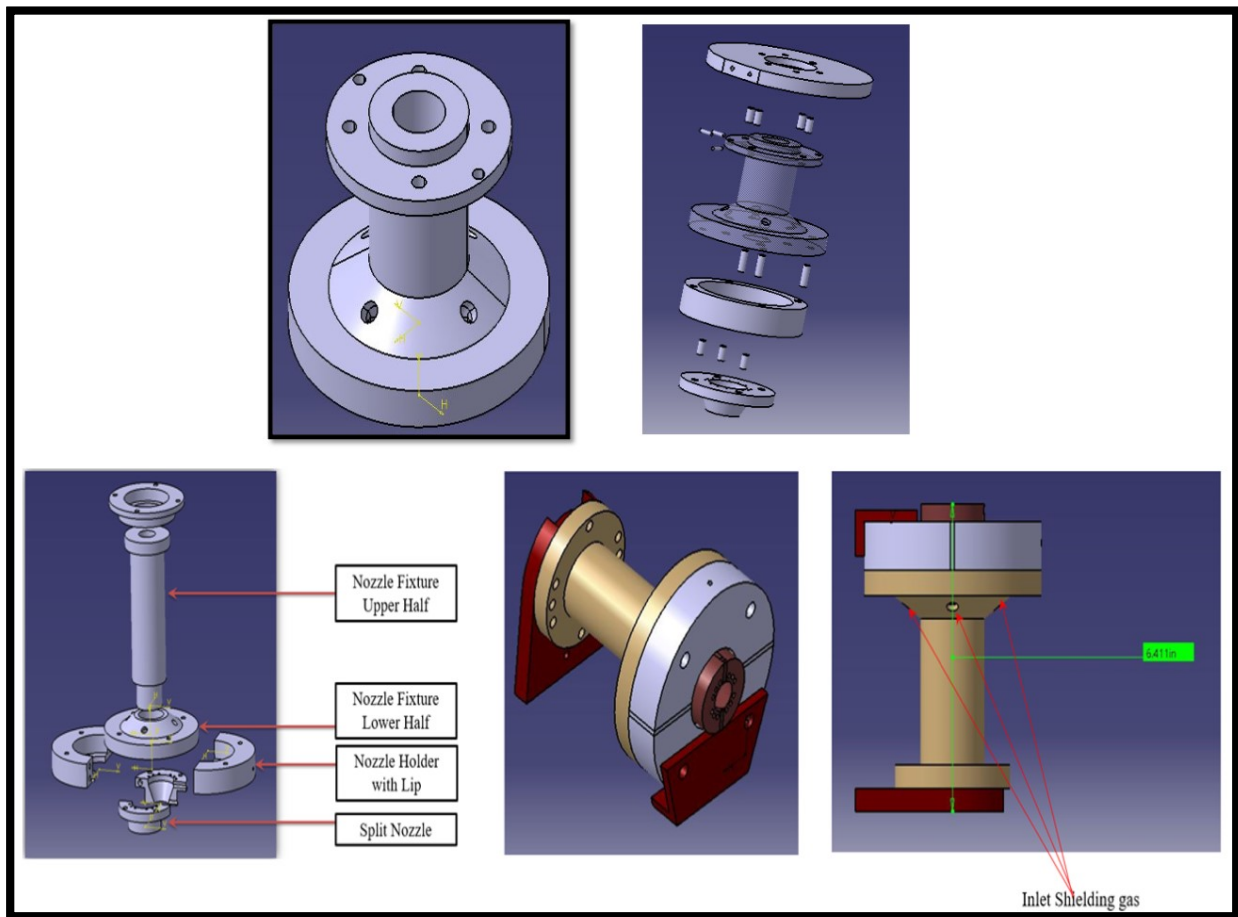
The gas inlet manifold, nozzle holder, nozzle midshaft connector and the optic assembly base flange sub-assembly progression from top to bottom.
